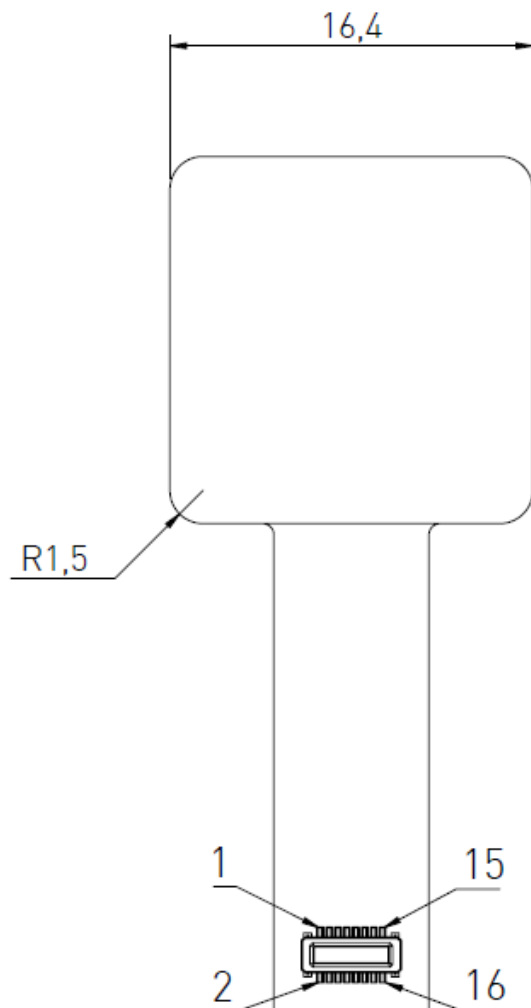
Part Drawing FPC1020AM CM03 – bottom view
